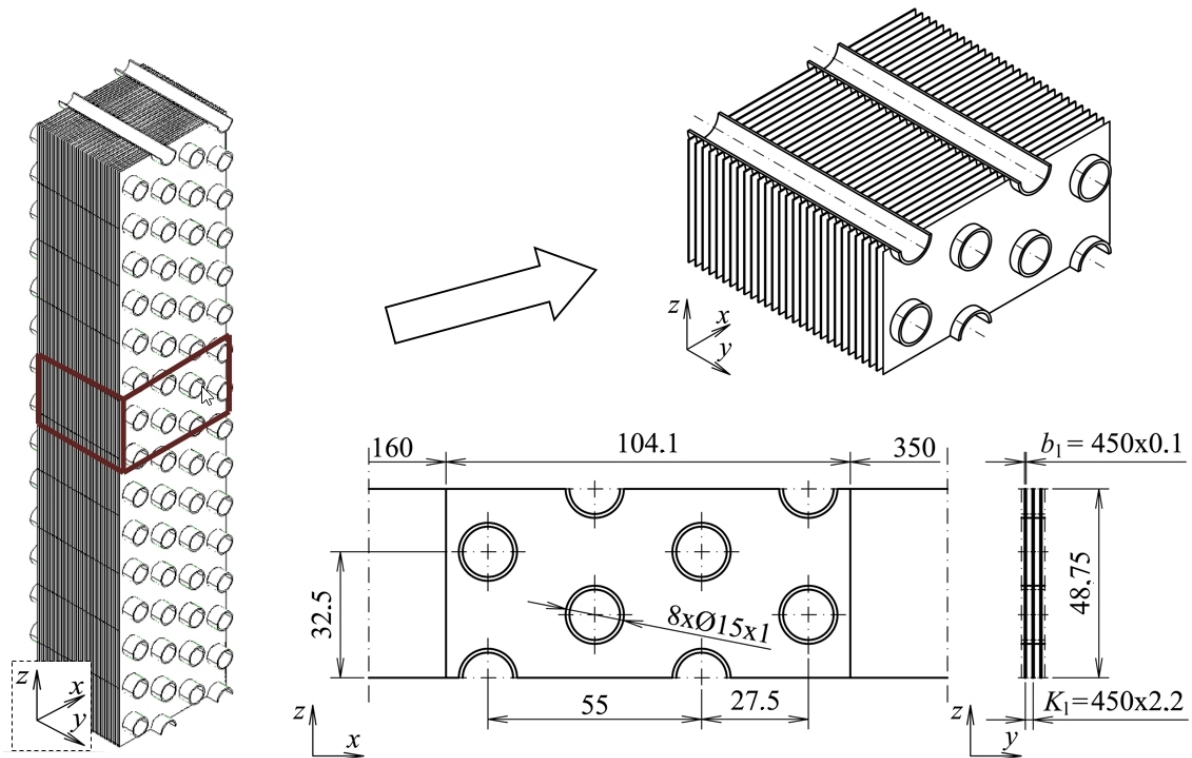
Schematic view of tested fin-and-tube heat exchanger
